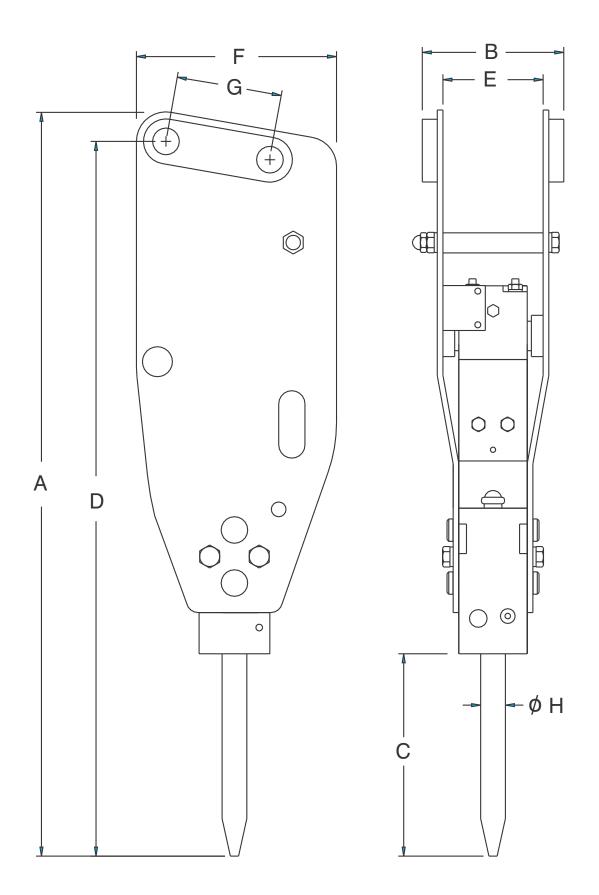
Dimension Drawing - Model AR 48 Mini-Excavator Configuration (XSF)
